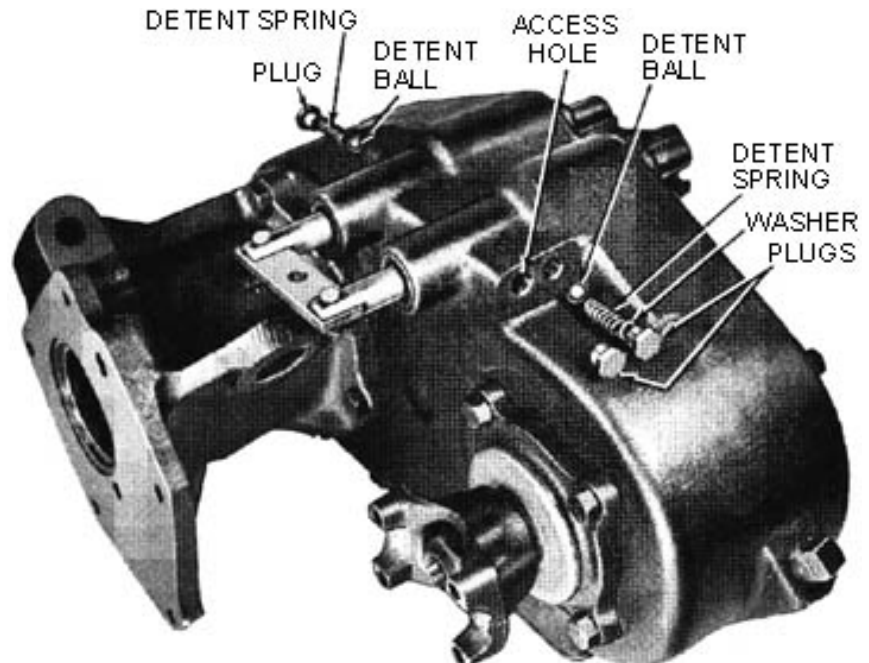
Front and Rear Drive Shift Rail Detent Balls, Springs, and Plugs
